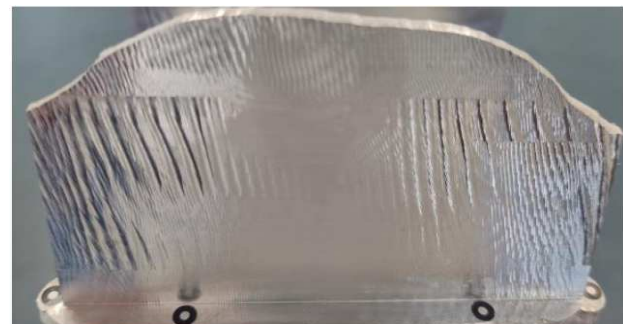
Thin-walled part after milling by end mill with helix angle 30°
